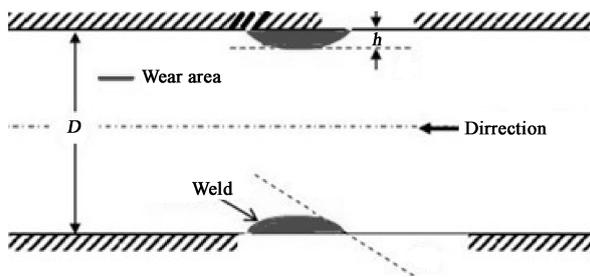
Schematic drawing of wear area in a welded joint<sup>[22]</sup>
